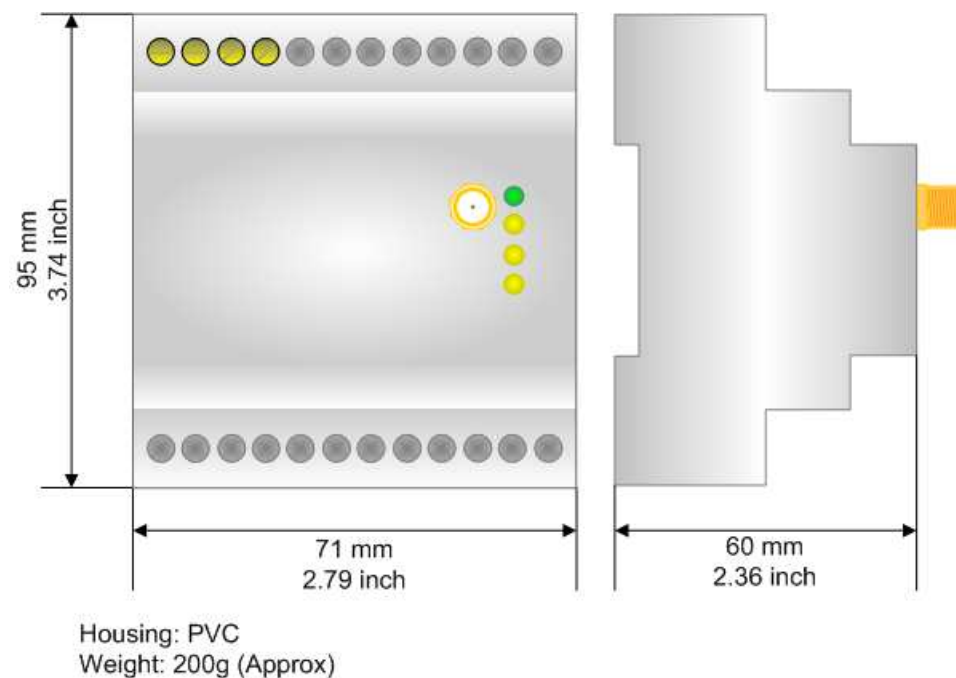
Mechanical dimensions scheme for HD67083-B2-xxxMHz-xxx
